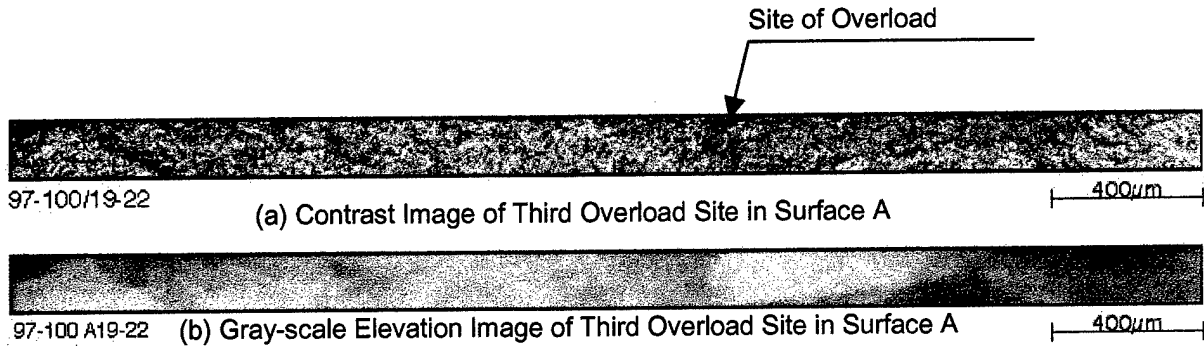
Contrast and gray-scale elevation images of fracture surface area surrounding overload site.
